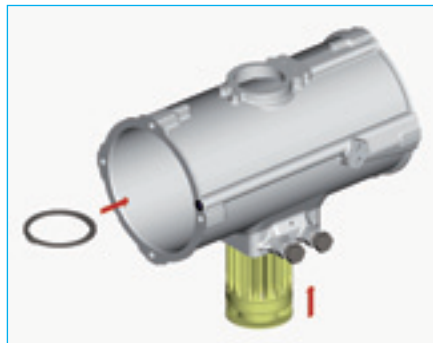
| Inserting the drive pinion AD/AS-350 to 750
